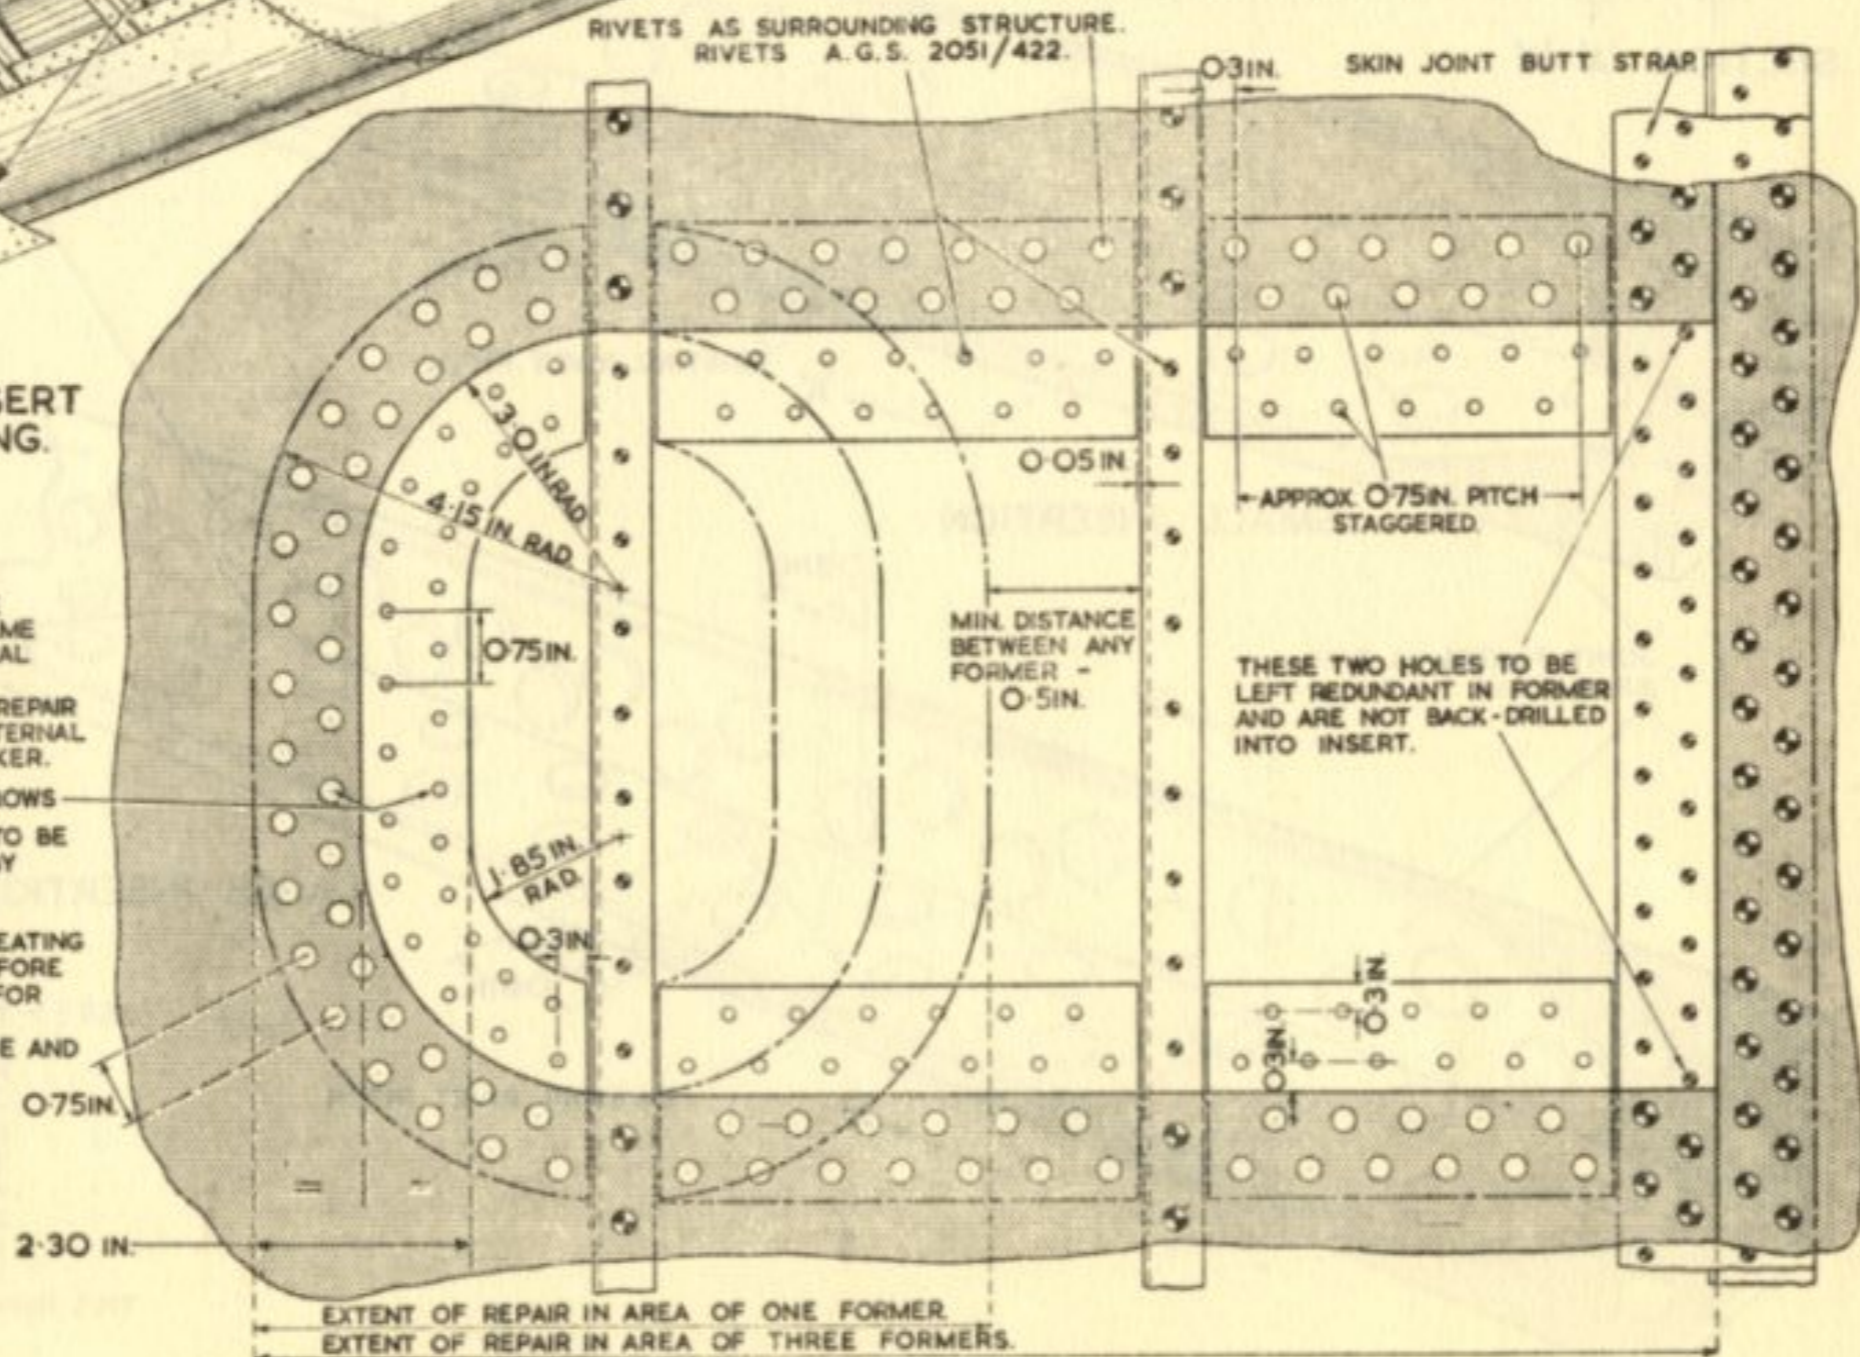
Skin repair—between rear engine bulkhead and transport former Stn. 428-0
